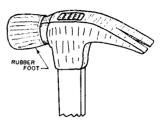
W5YVQ slips a "rubber foot" over the head of the hammer when the tool is used for forming aluminum,
